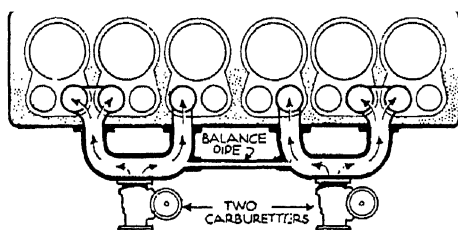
Improved Six-cylinder Engine Inlet Manifold using Two Carburetors.
